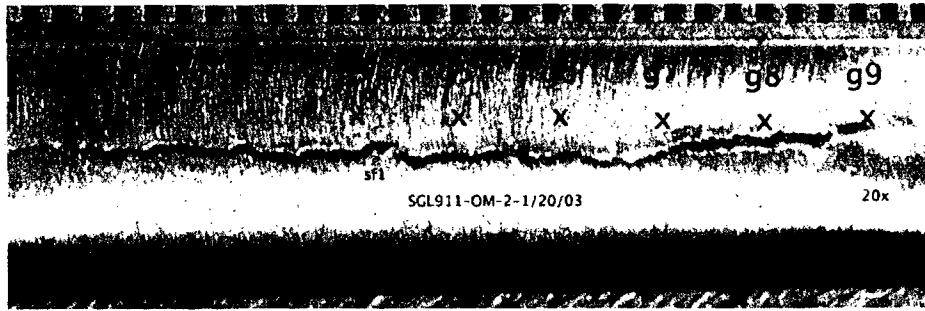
SCC axial flaw SGL911-OM-2-1/20/03.
